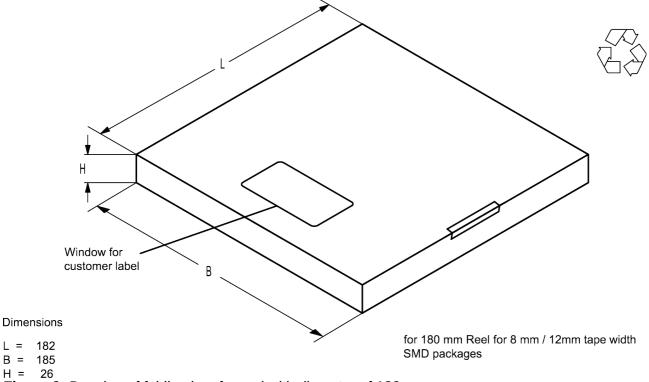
Drawing of folding box for reel with diameter of 180 mm.
